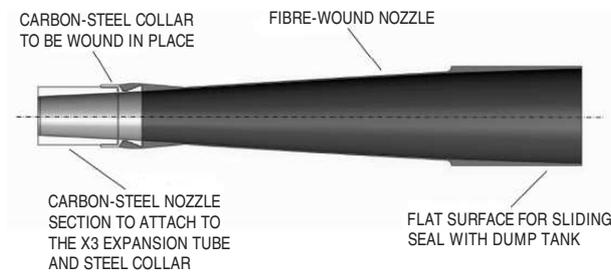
Sketch of the X3 steady expansion nozzle [2]
